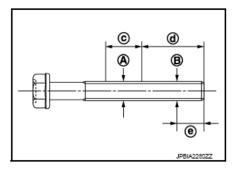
Main Bearing Cap Bolt Dimensions Courtesy of NISSAN NORTH AMERICA, INC.
